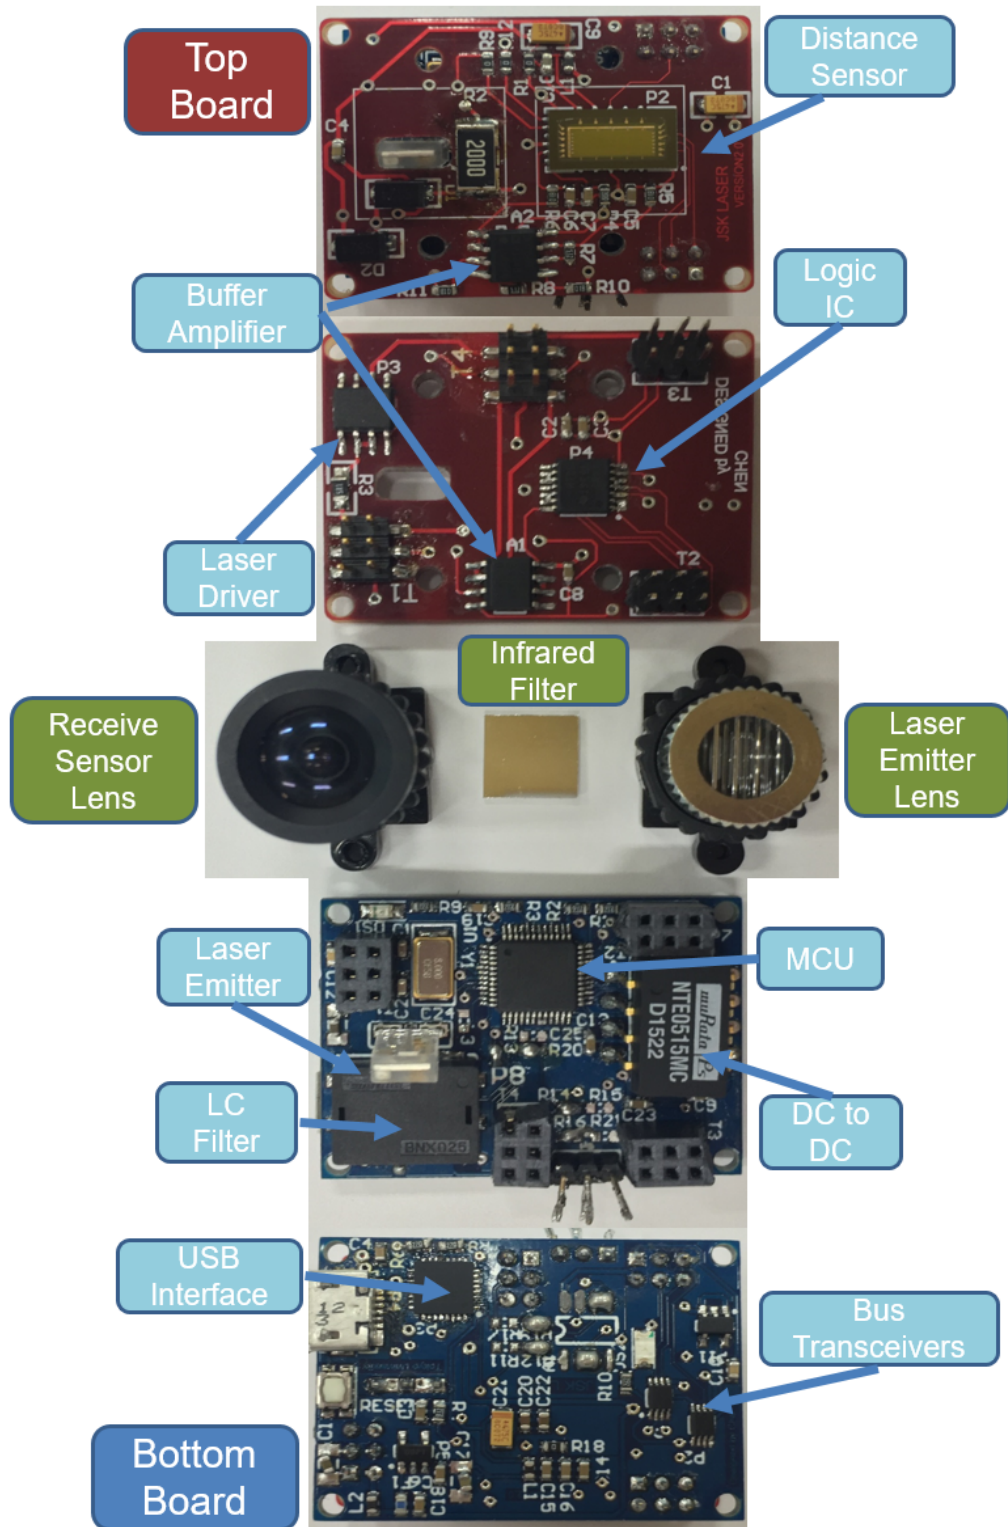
Hardware overview (The red PCB board is the top board and the blue is the bottom one; The PCB boards have 4 layers and the inner 2 layers are the power signals)
